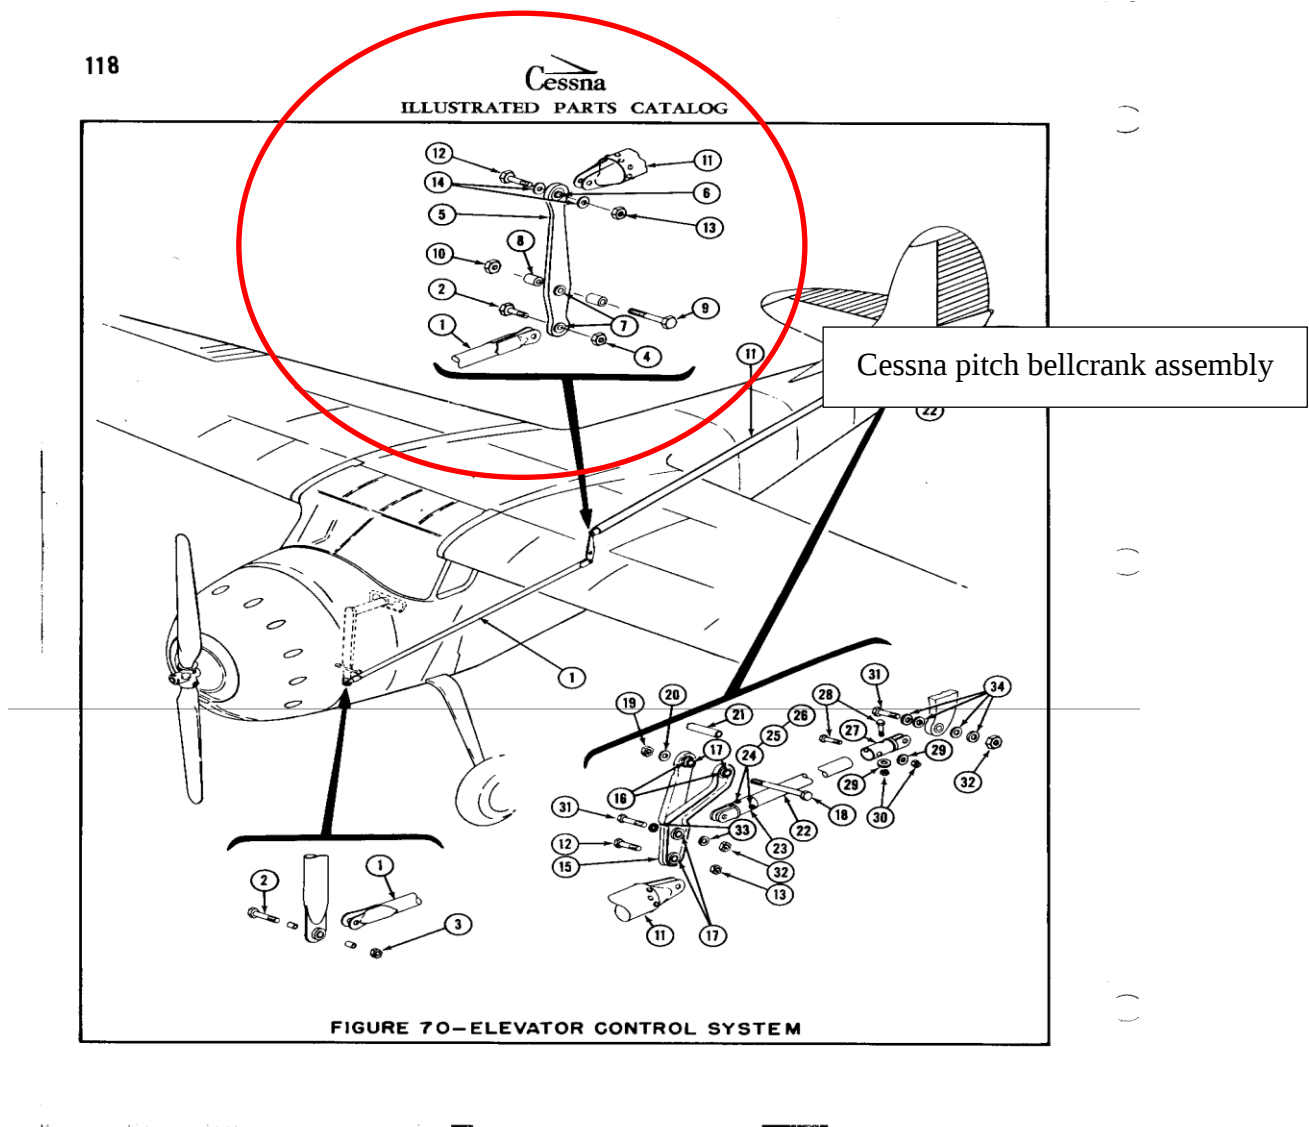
CESSNA PITCH CONTROL ASSEMBLY
